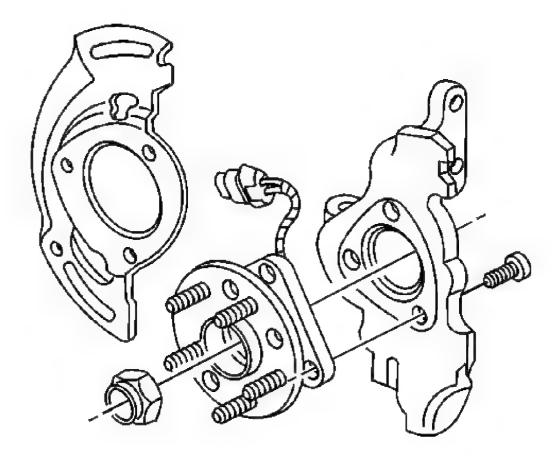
Removing/Installing Wheel Bearing/Hub Retaining Bolts Courtesy of GENERAL MOTORS CORP.
